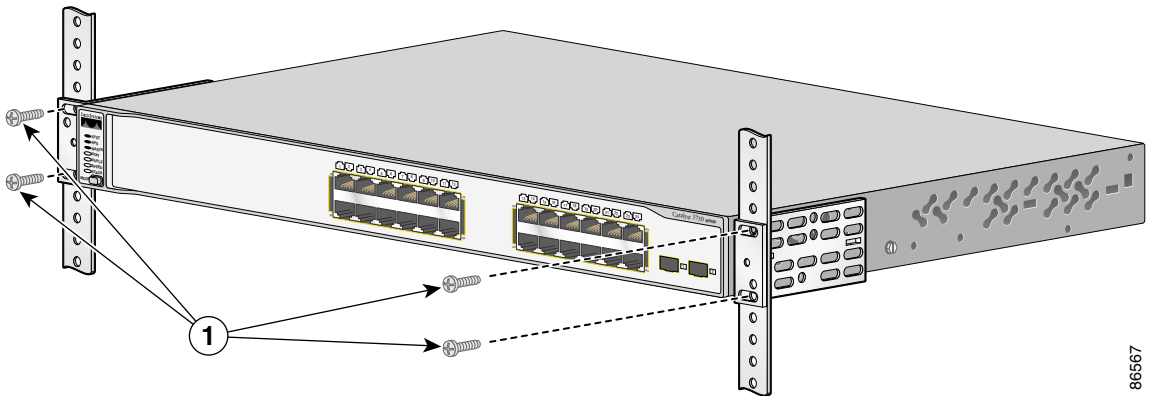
Mounting the Catalyst 3750G-24TS Switch in a Rack
